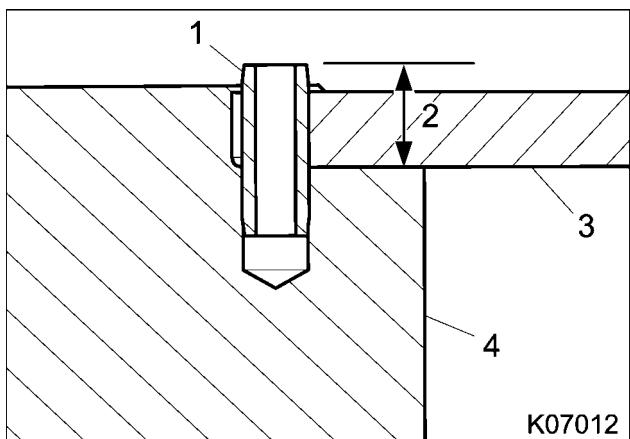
Crankshaft timing disk alignment spring pin (cut-away)
